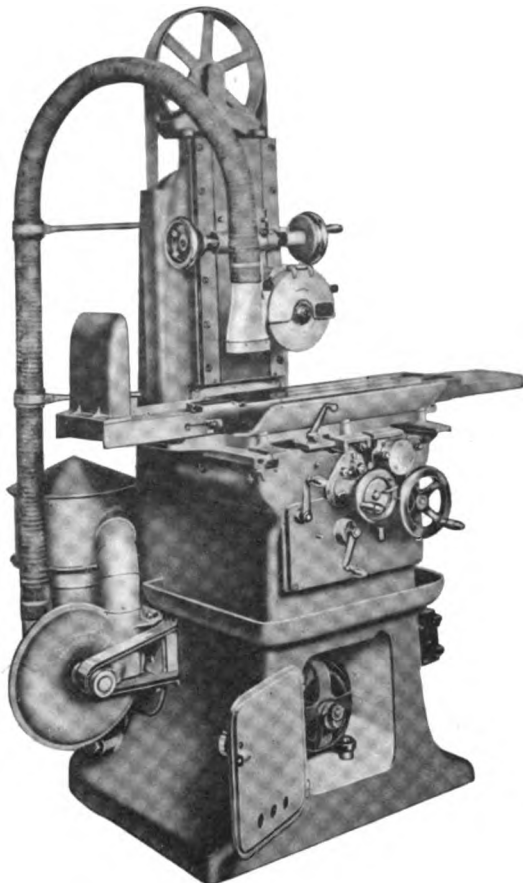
Horizontal Spindle Type Motor Drive with Exhaust Attachment
